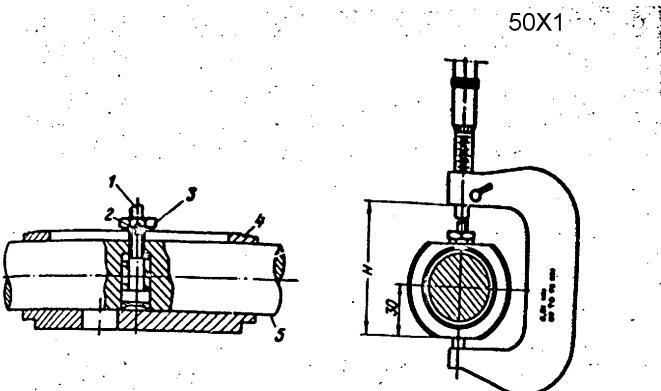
CUTTING TOOL ADJUSTMENT WITH THE AID OF A MICROMETER FOR BORING MASTER ROD CRANKPIN END BUSHING
